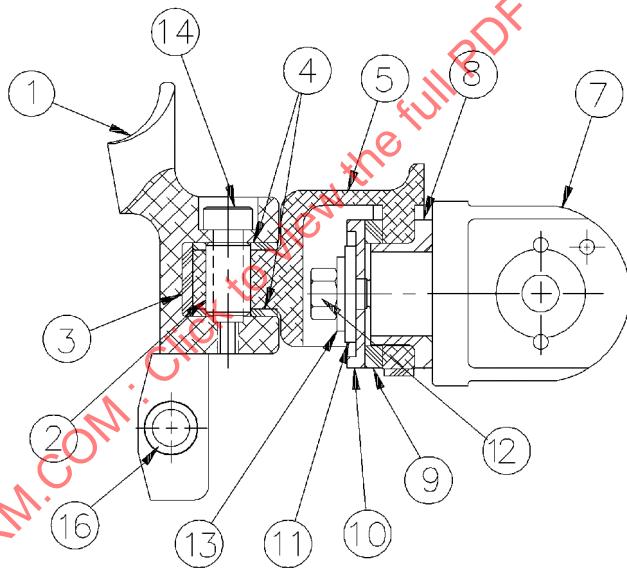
SHOULDER ASSEMBLY - FRONT VIEW
